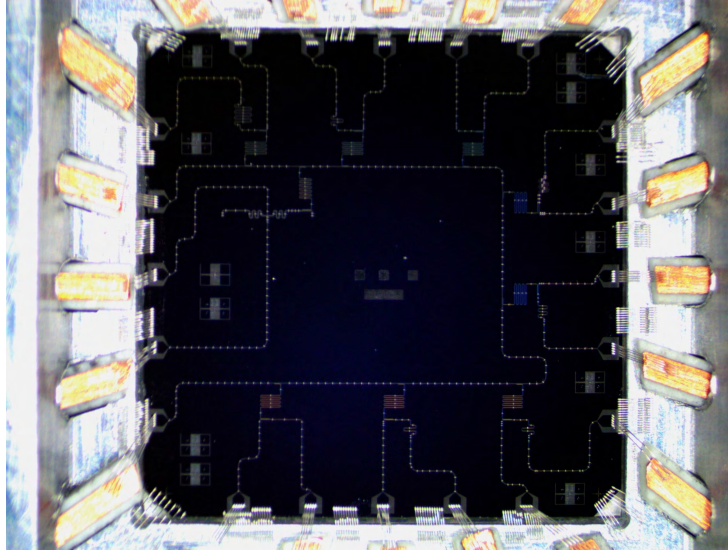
$1 \times 1 \text{ cm}^2$ die wirebonded into an aluminum box with recessed cavity above and below (lid not shown). Copper traces on a PCB strip enter the box through tunnels, and are wirebonded to the on-chip bond pads using several wirebonds in parallel (here, four or five). Ground planes of the chip are wirebonded to the box ground around the edge of the chip in between the bond pads as uniformly as possible to provide a good microwave path to ground, and to help reduce crosstalk and spurious chip modes [94].
